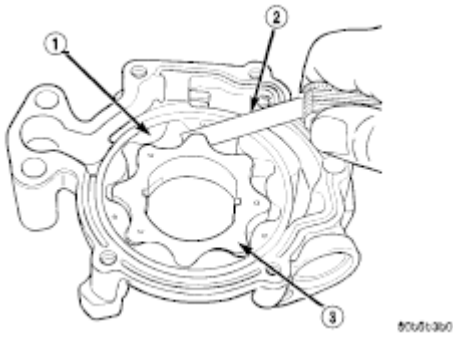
Measuring Clearance Between Inner And Outer Rotors
